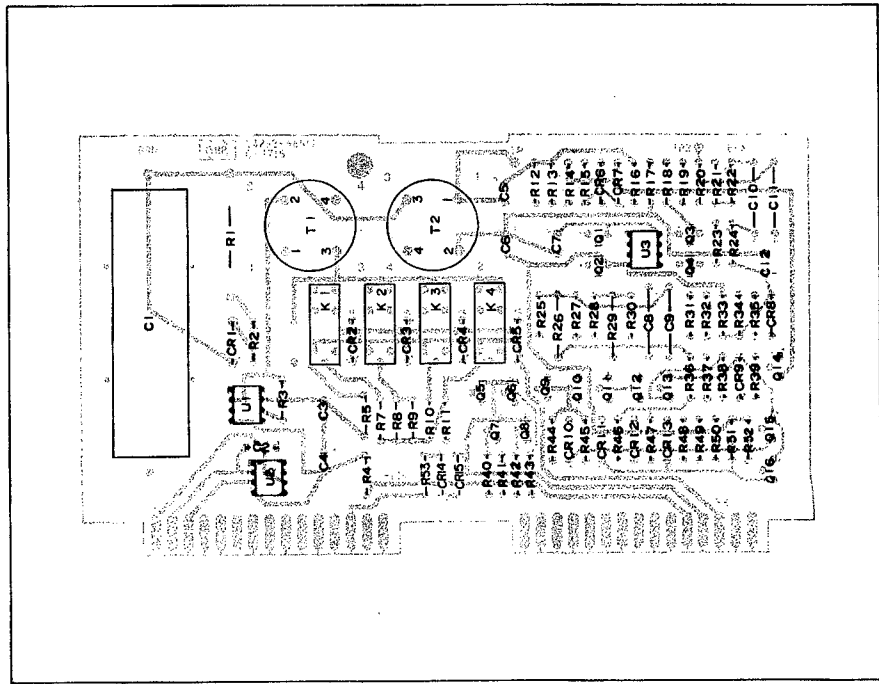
A11 OSC & Source Resistor Board Assembly Component Locations.
